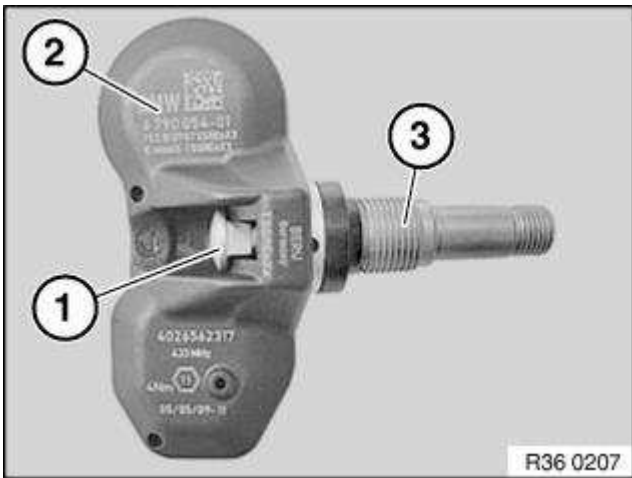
Installing Electronic Wheel Module Insert New Square-Head Bolt (1) In Wheel Module (2)
